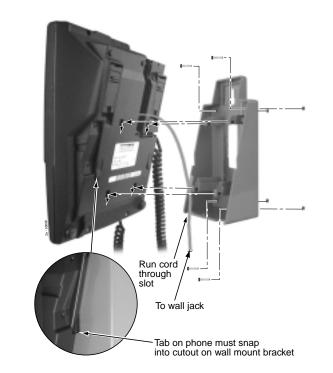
INSTALLING THE WALL MOUNT BRACKET 4-19
